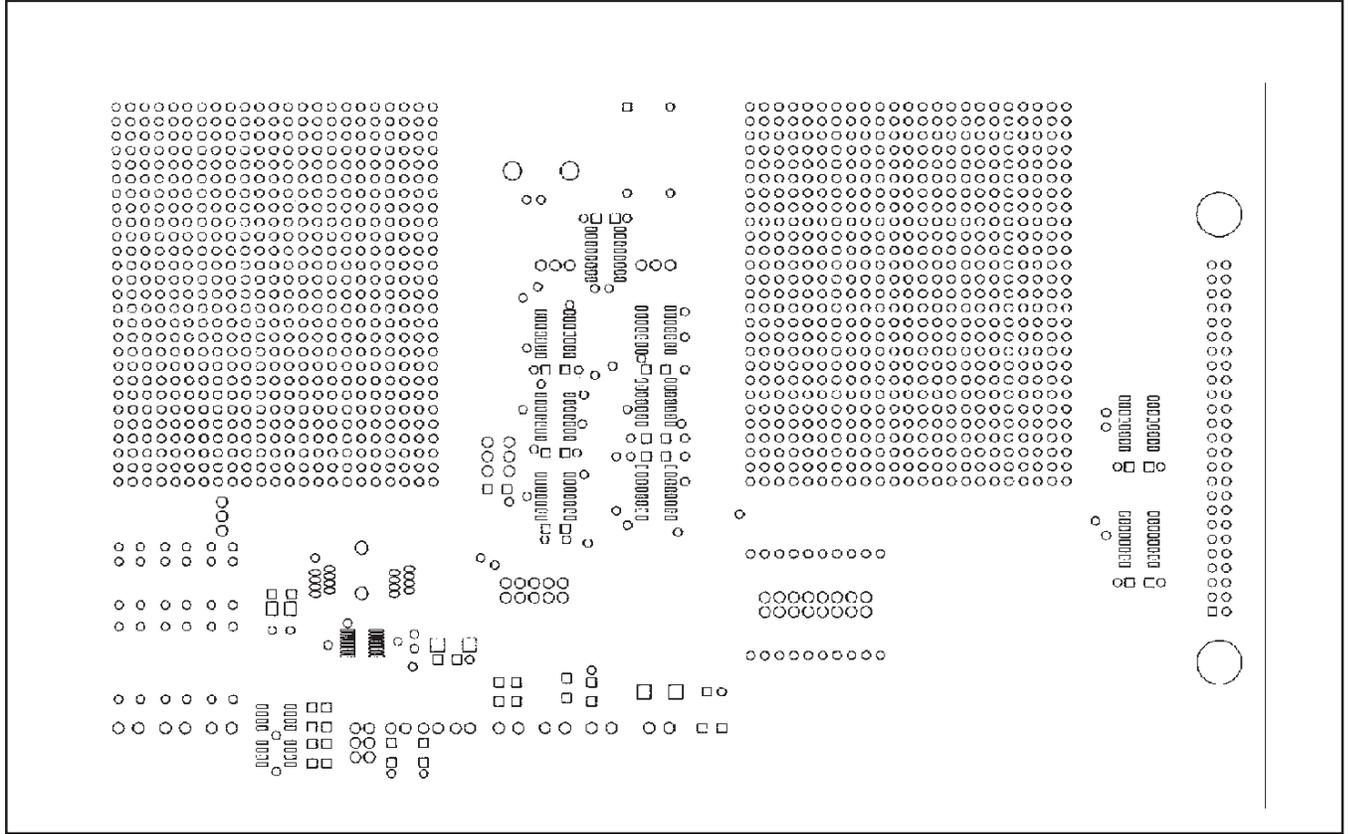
Component Side Soldermask of the DEM-ADS7843E/45E Demonstration Board.
